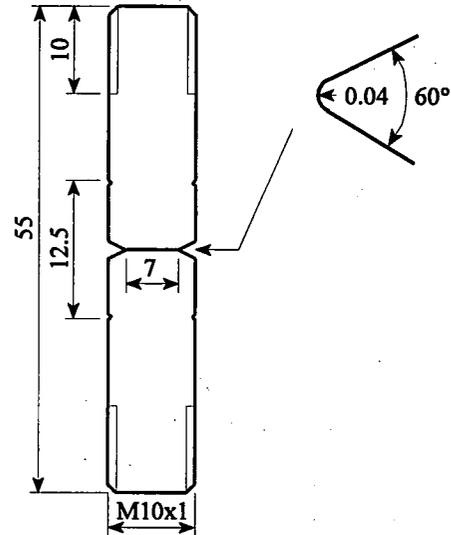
Specimen size; the threads are machined after precracking the specimen.
